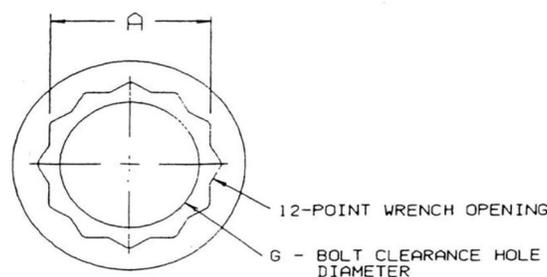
B - BOLT CLEARANCE HOLE REQUIREMENT
